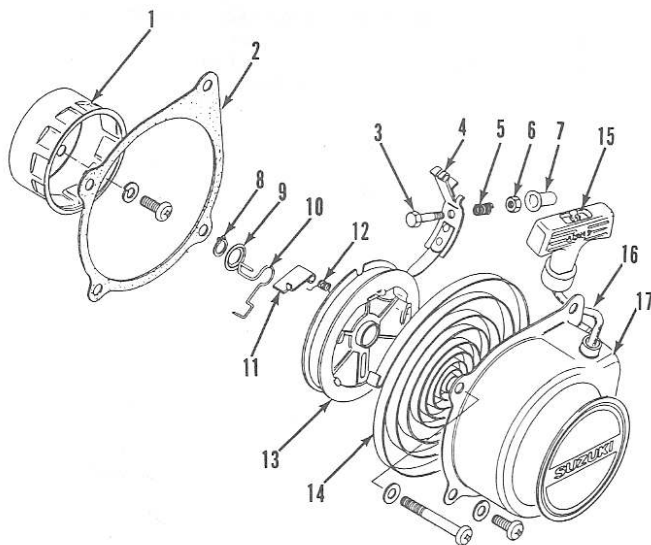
Exploded view of manual starter assembly used on both models.
